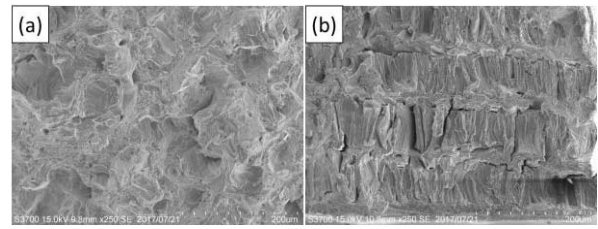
Fracture surfaces of as-built 0deg. specimens of (a) 67/67 block, (b)90/90 block after tensile test at 650°C (Top).
